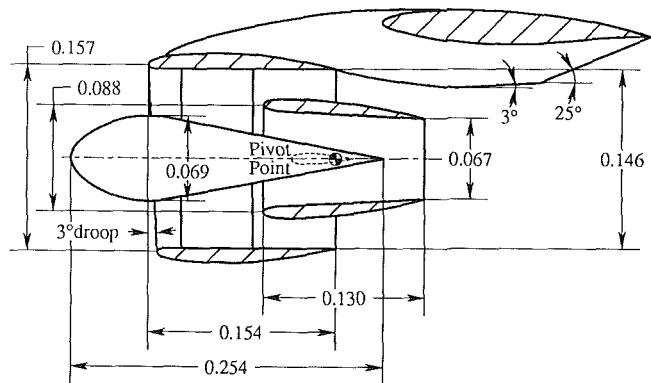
Sketch of superfan configuration number 2 (SF-2); dimensions shown in m
